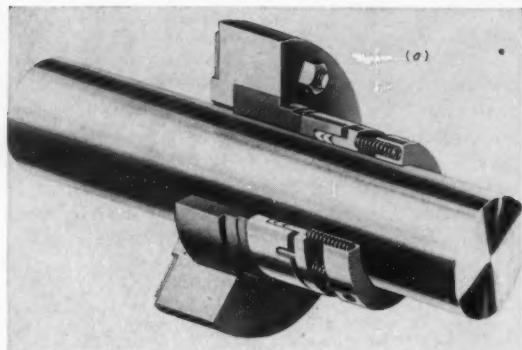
Representative inside and outside-mounted mechanical seals. Outside unit, *a*, removes seal component parts from contact with an abrasive fluid. Mechanical protection to seal components is provided by the inside-mounted seal, *b*.
